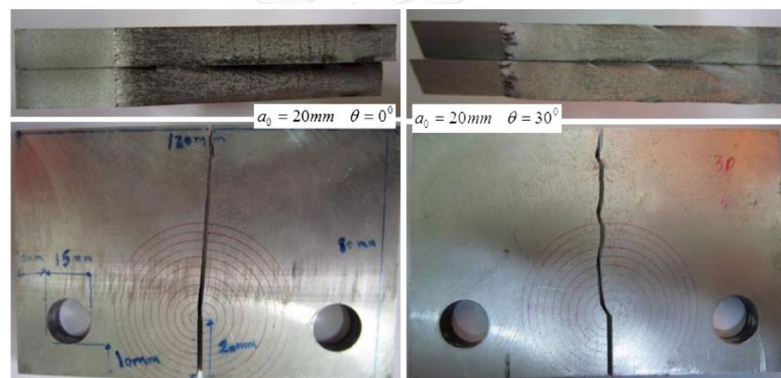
Crack growth paths and fracture surfaces [21]
